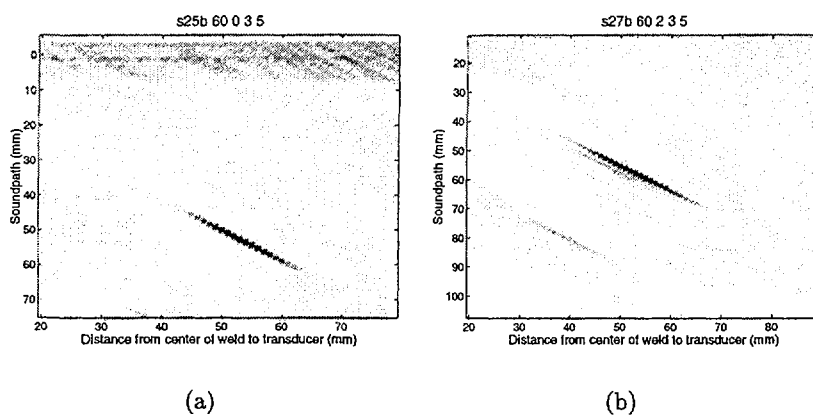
Backside measurements from slag using the 60-degree 3.5 MHz transducer (a) 3 mm slag, 25 mm from bottom surface (b) 5 mm slag, 26 mm from bottom surface.
